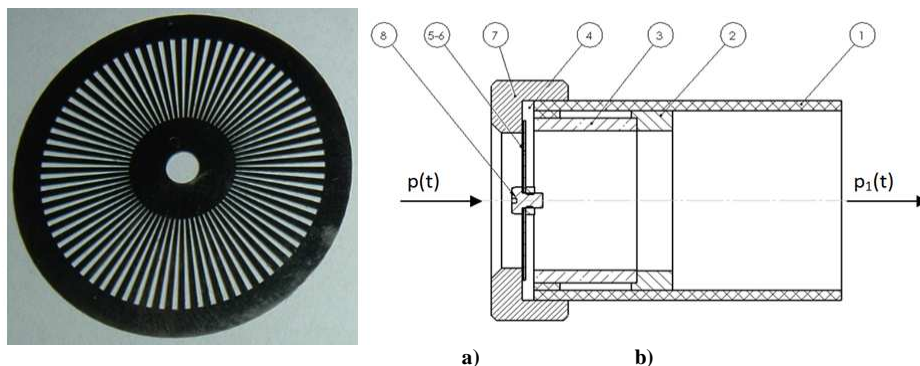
The flow control device: a) plate with notches; b) scheme: 1 – cylindrical body; 2 – mounting ring; 3 – piezoelectric actuator (cylinder); 4 – mounting ring of the plate with a pad; 5 – plate; 6 – plate; 7 – threaded mounting ring; 8 – center tab
